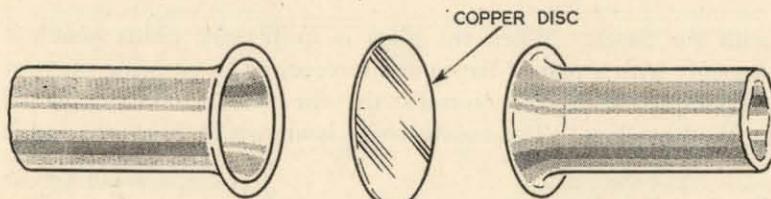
EXPLODED VIEW OF COPPER DISC SEAL
